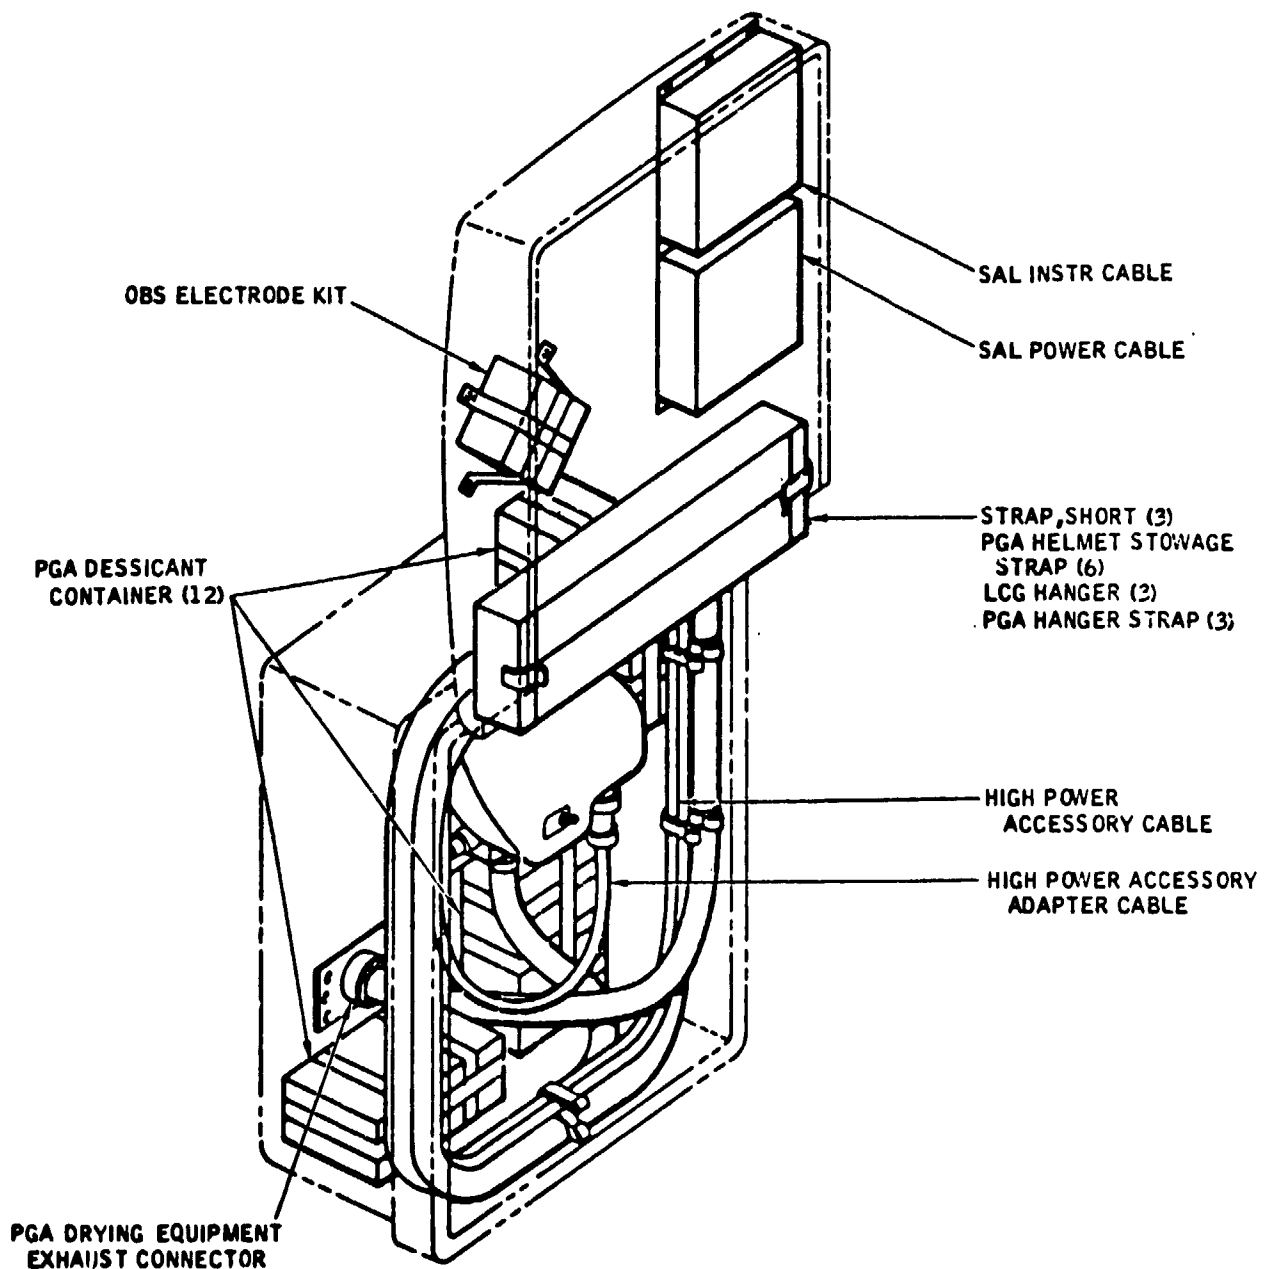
PGA SUPPORT EQUIPMENT STOWAGE
